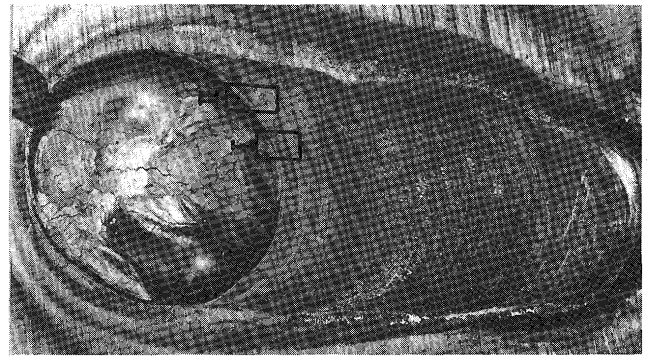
Surface appearance of SUS 310S weld bead quenched in water during welding at high weld heat input of 350A, 20V and 20 mm/min, and I and II give positions of (a) and (b) in Photos. 2 and 3.
